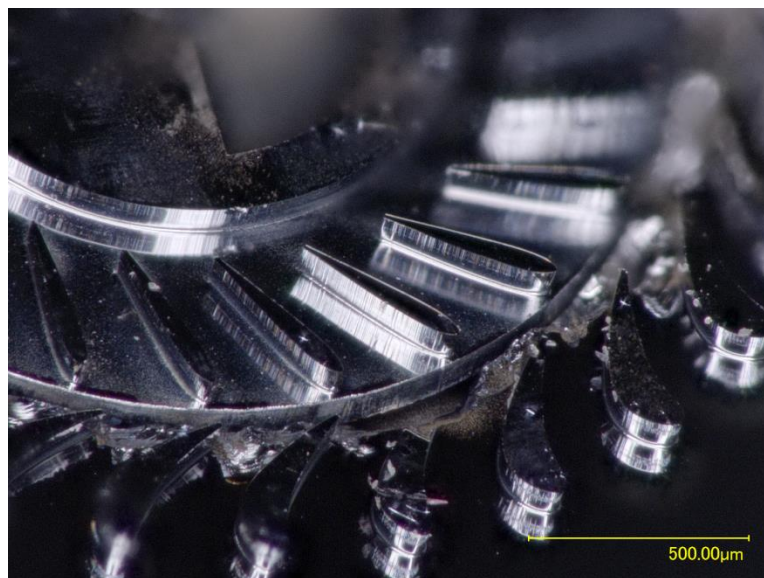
Photograph of 2.5 mm rotor diameter, stainless steel ball device after testing
